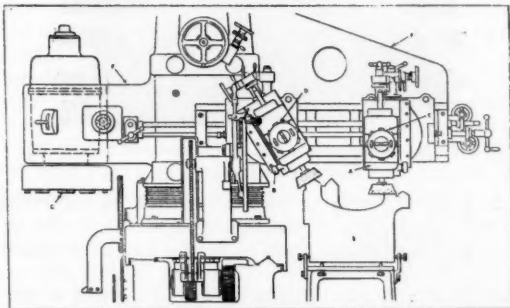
Side View of Way Grinder of Tapering Head Type, showing Application to Lathe Bed
